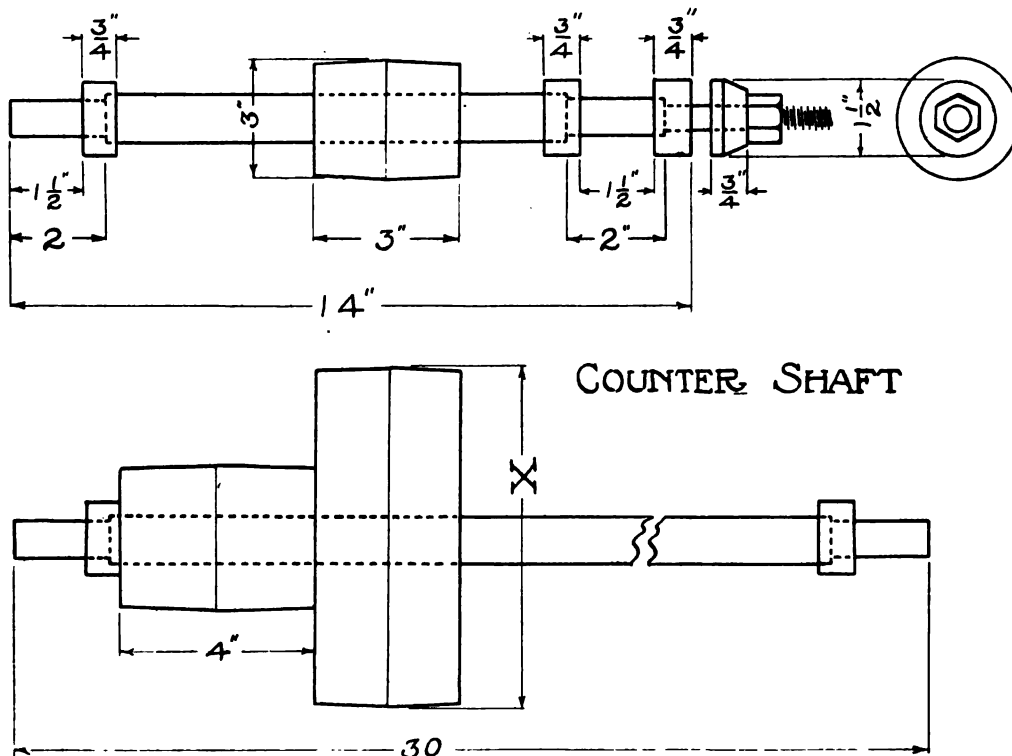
PLATE C. SAW ARBOR AND COUNTER SHAFT.
